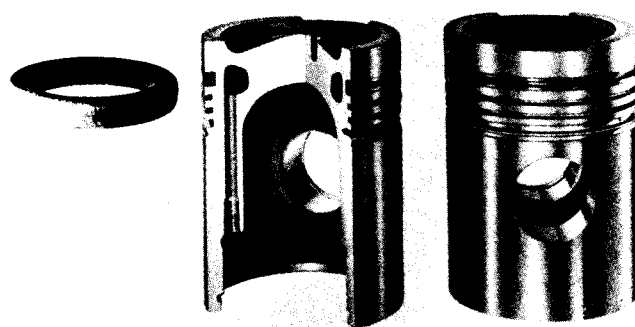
Diesel piston with cooling channel, and torus-shaped casting core; outer diameter 220 mm
